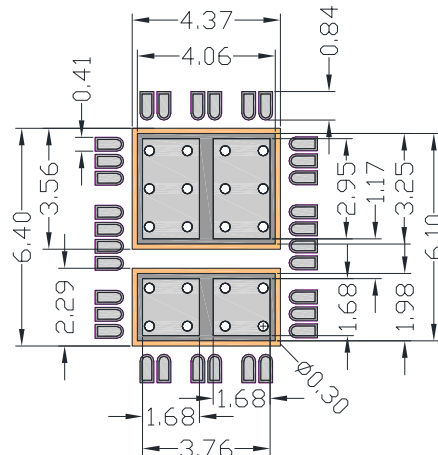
PD70224 Top layer Solder Mask, Solder Paste and Vias Recommended PCB Layout (mm)
